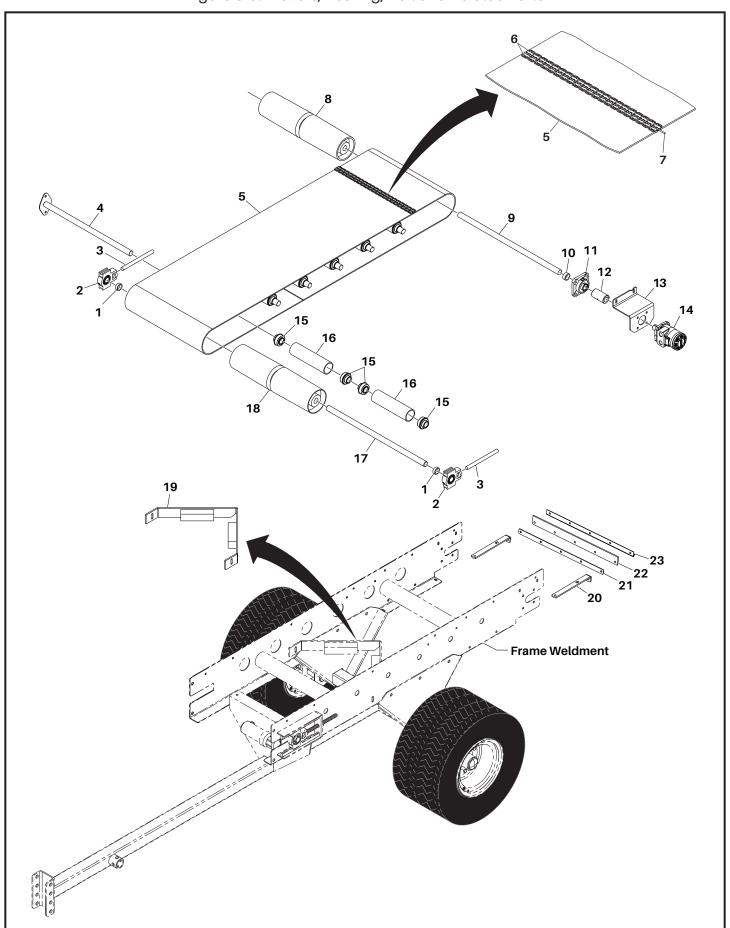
Rollers, Bearing, Belt and Related Parts
